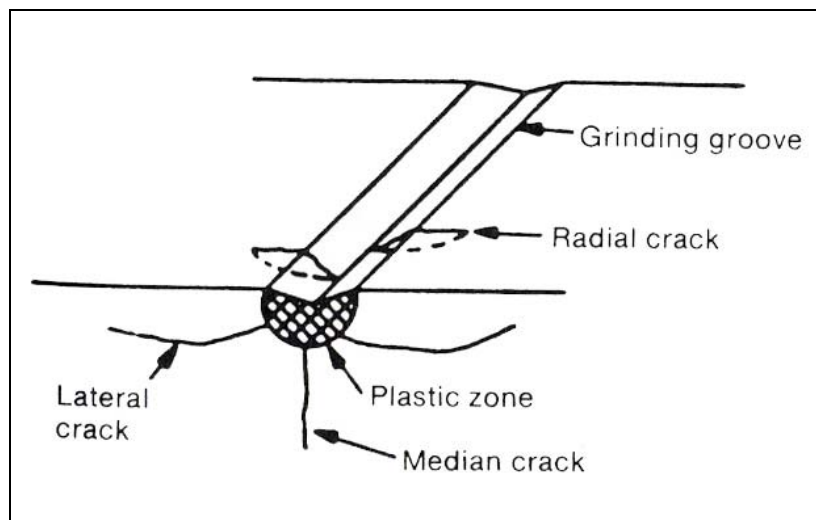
Schematic showing cracks and material deformation occurs during machining [104].
